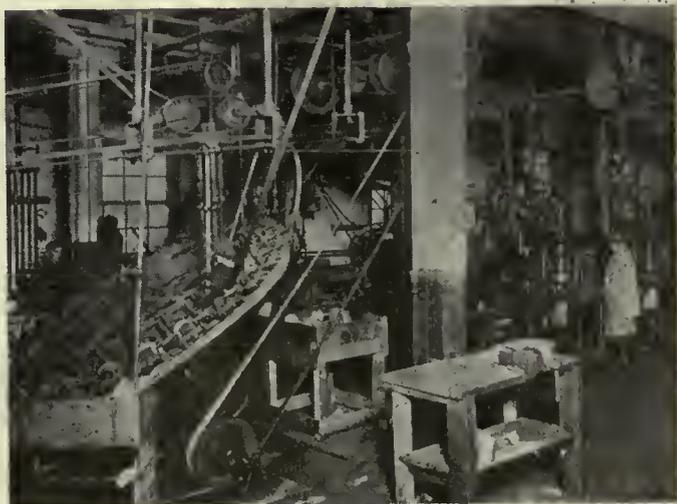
TESTER AND DOUBLE SEAMERS ON SANITARY LINE.
